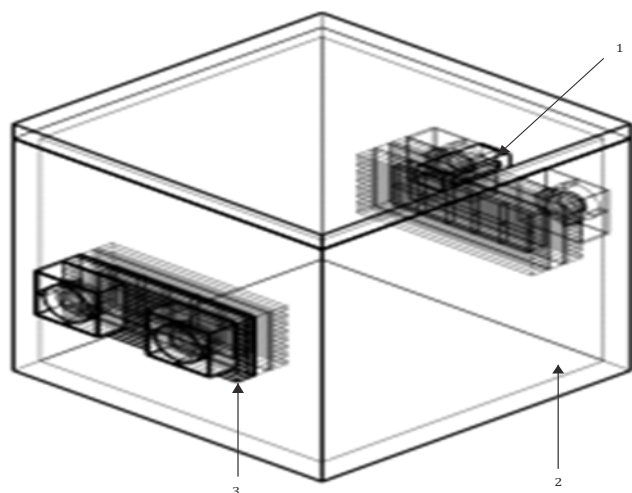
Assembly of Modules, Heat sink and Refrigerated Chamber
